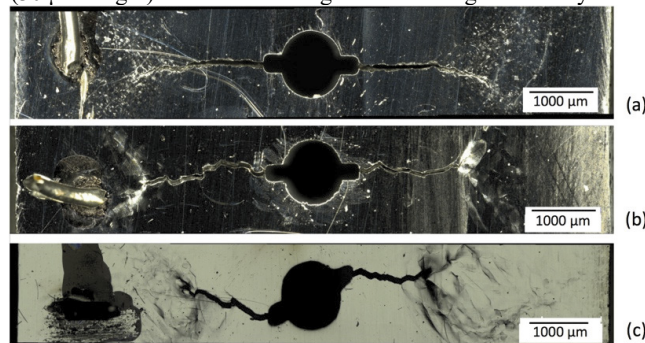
Crack paths observed at the end of the test for (a) Base metal, (b) N90-Welded and (c) N60-Welded specimens. (observations were made with a 0.1kN applied loading)
